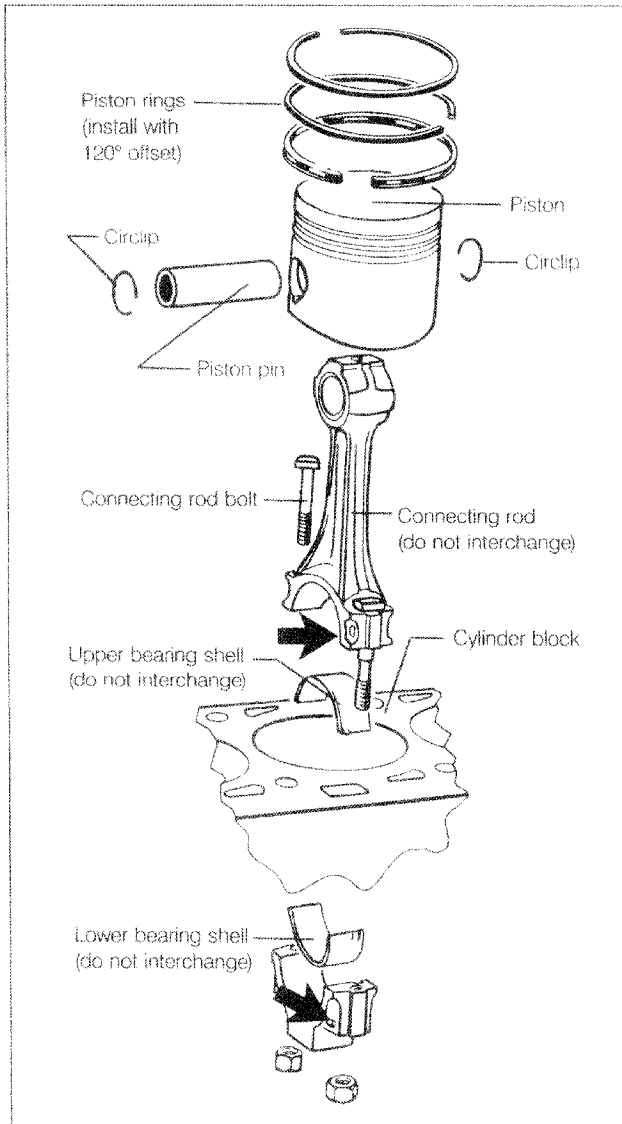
Components of piston and connecting rod assembly. Connecting rod markings (arrows) face camshaft drive belt.
